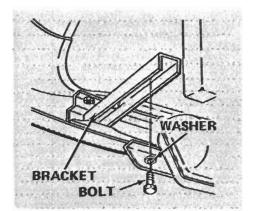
Cover plate being removed or installed on rear bumper.
